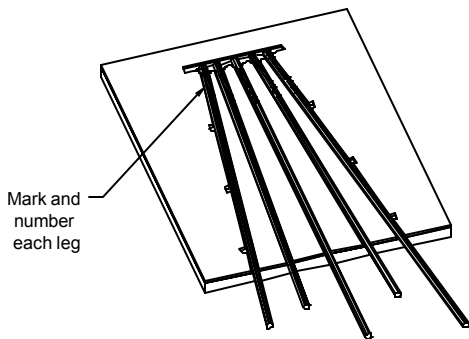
Cut the legs off parallel with the bottom of the jig.
